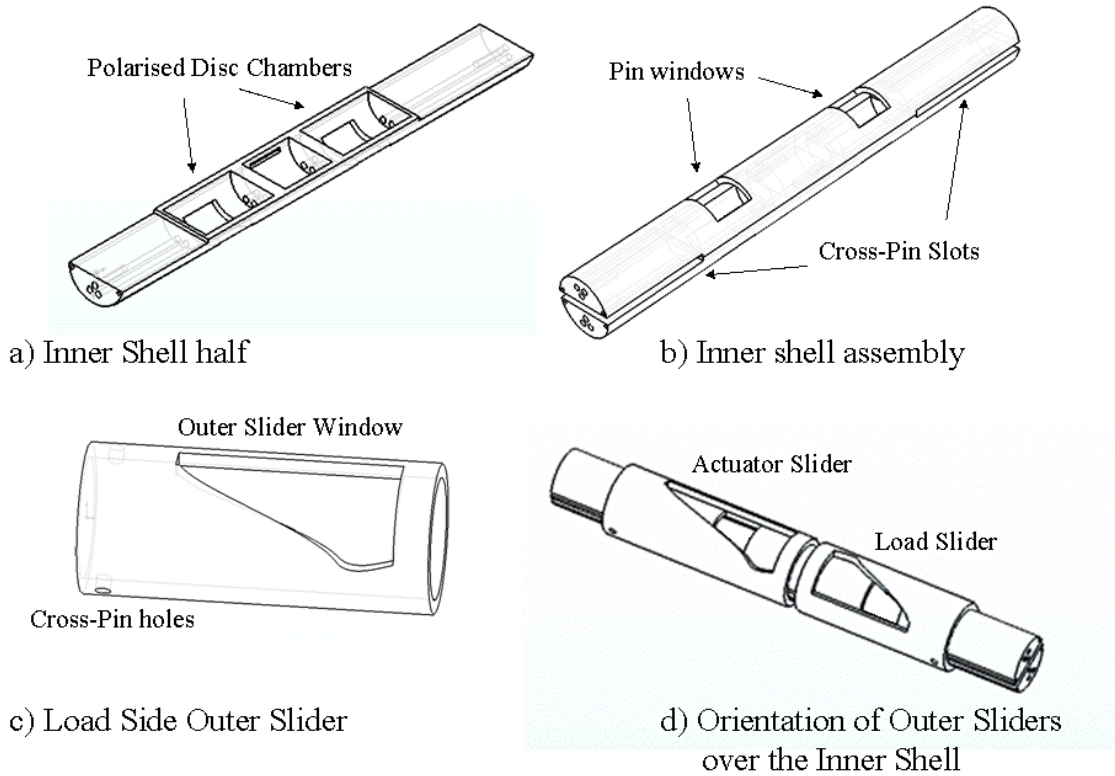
3-D CAD drawings of the FPT body and assembly. a) The Inner shell was made in two half sections. The polarised discs, the emitter and phototransistors, and shaft bearings were placed in the chambers of the lower half before: b) assembling the Inner shell. c) The Outer Slider window shape for each side was calculated to yield a linear output proportional to the slider position. The Cross-Pin holes aligned the slider with the slots in the Inner Shell. d) The sub-assembly depicted before the FPT spring is placed over the sliders and connected at each Cross-Pin.
